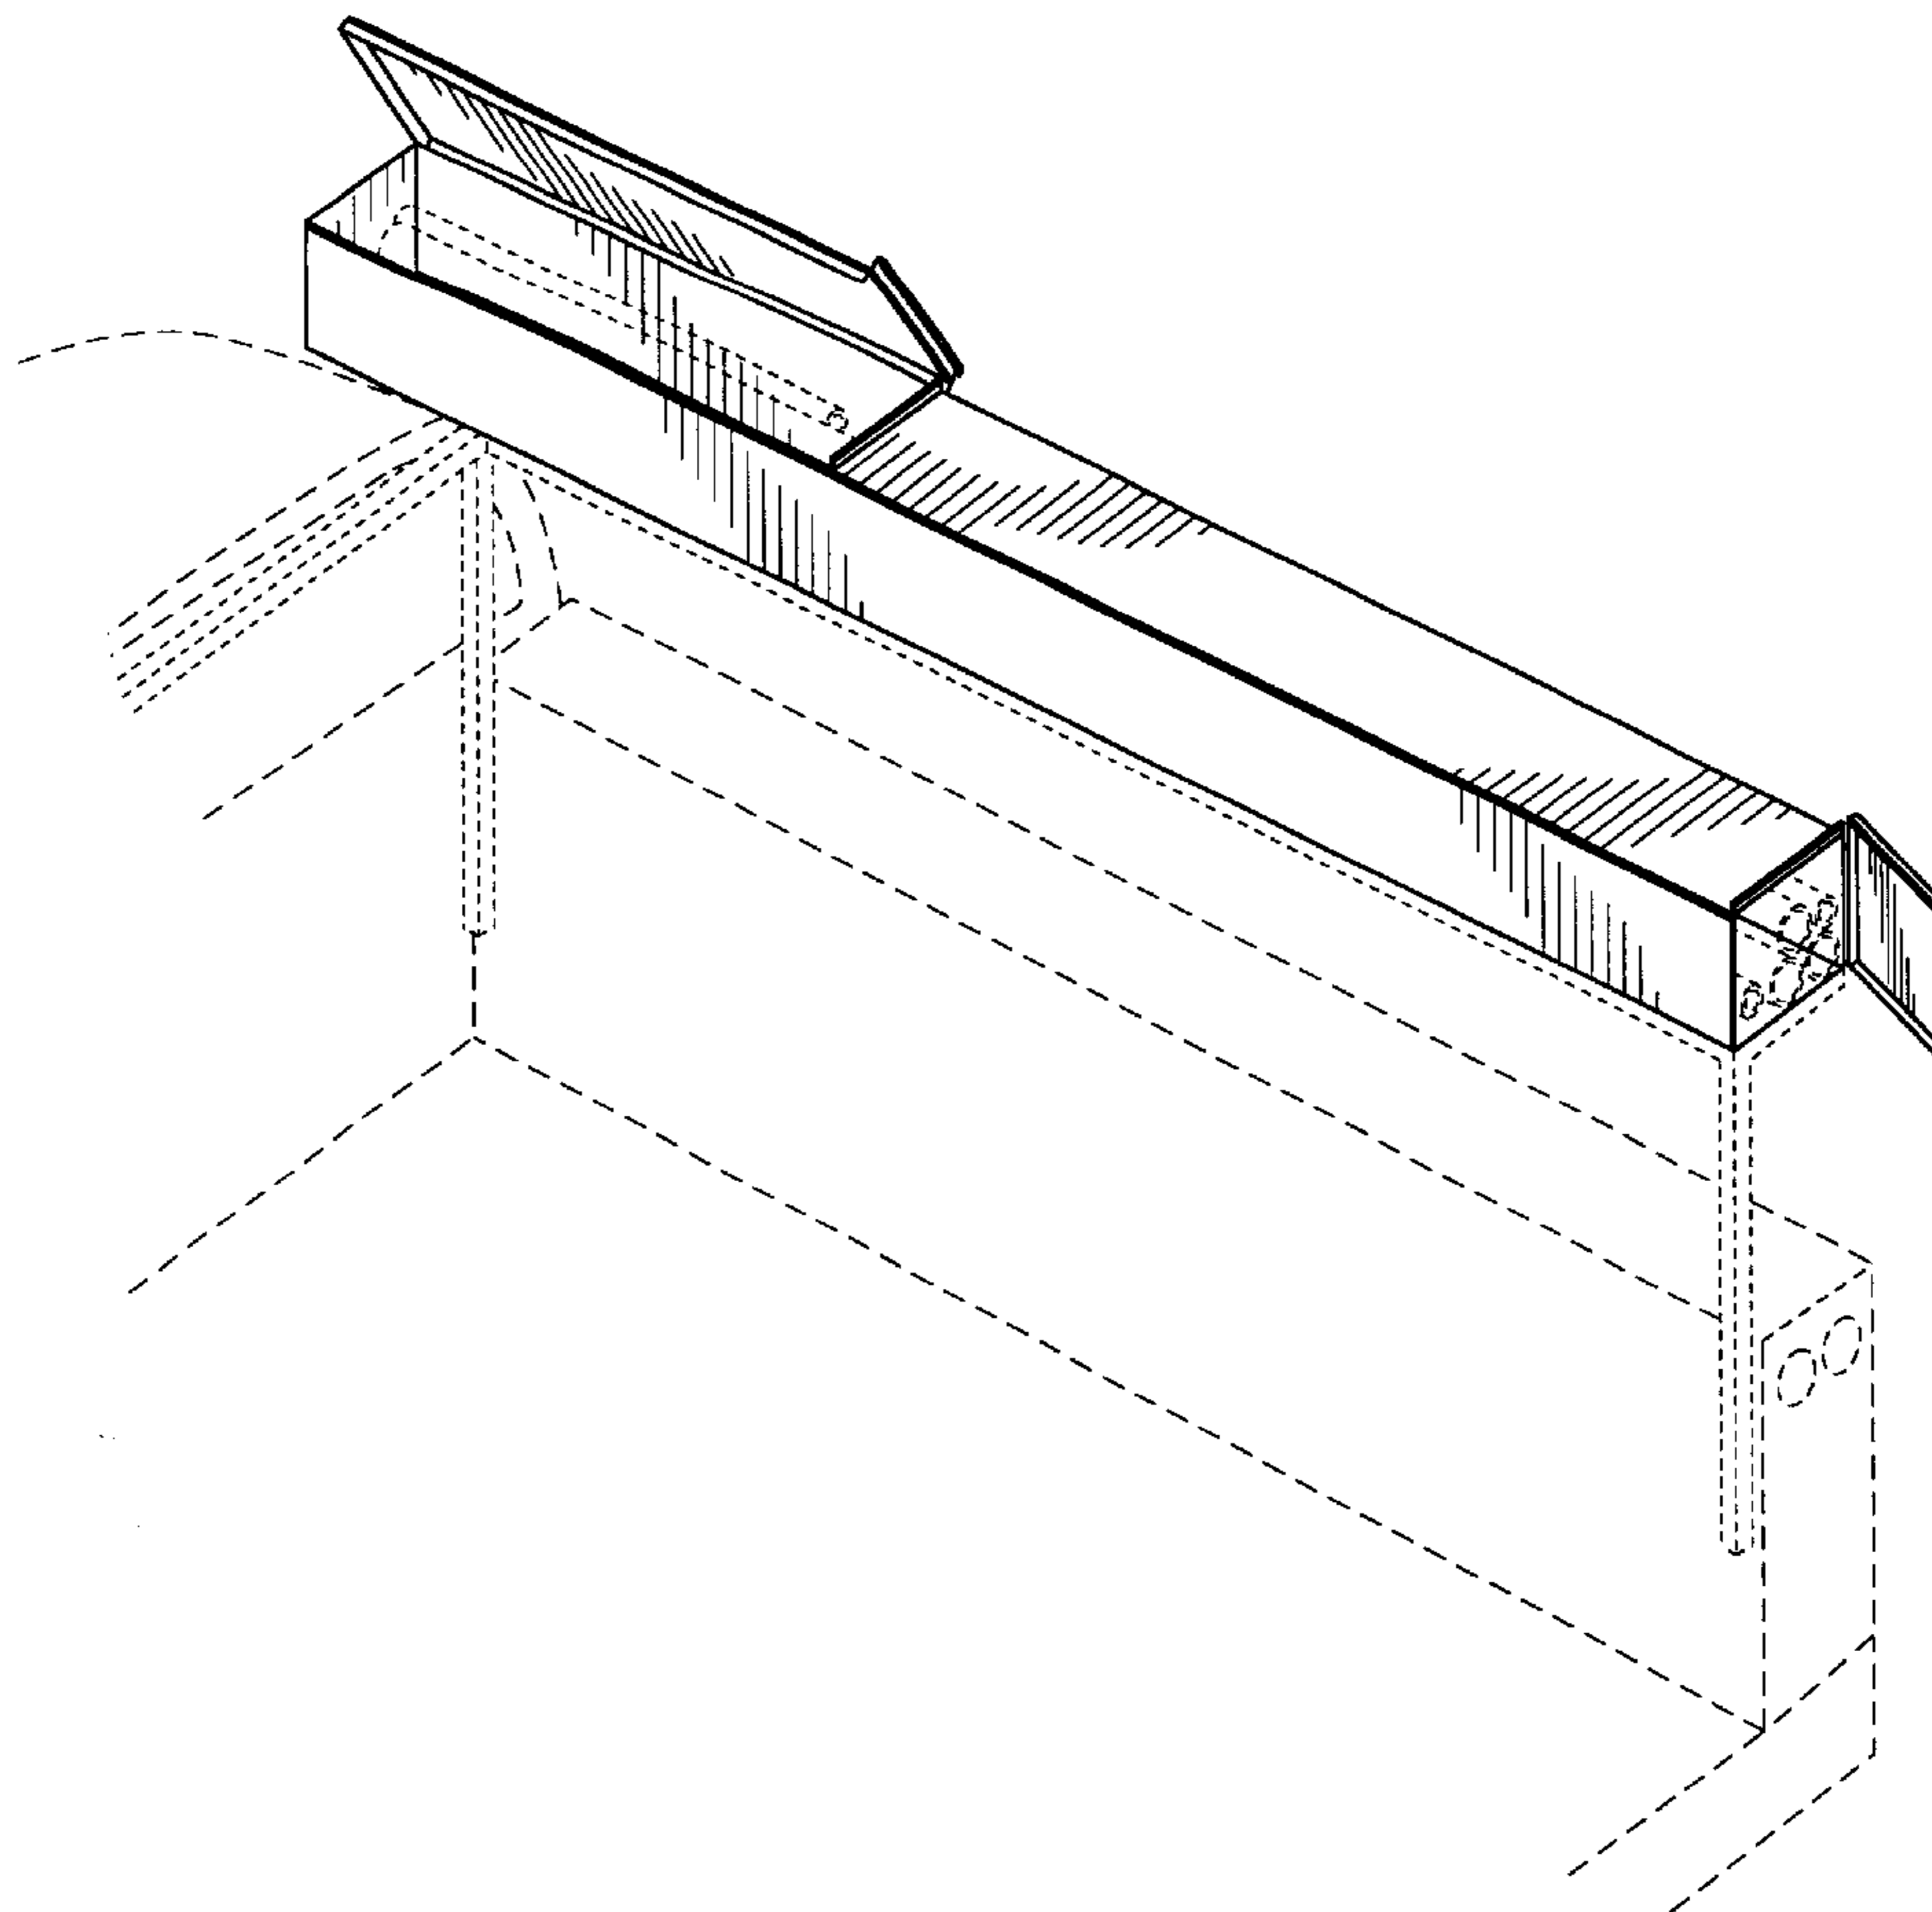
is a front perspective view of a vehicle-mounted conduit carrier, showing my new design, the environmental structure shown by broken lines forming no part of my design;
